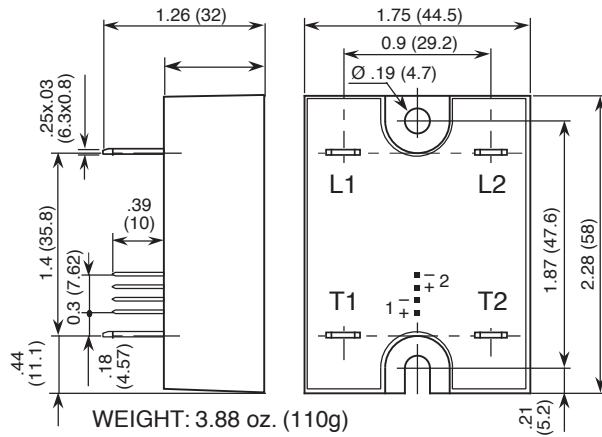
SD24R50-06, and SD24D50-06; dimensions in inches (mm)
